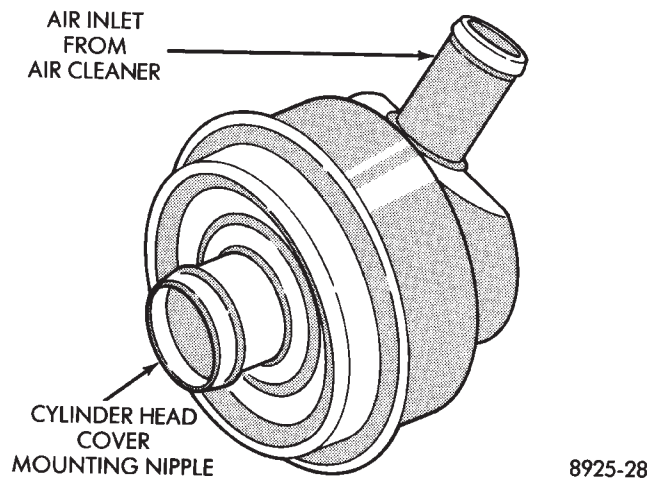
Crankcase Breather/Filter—5.2L Engine
